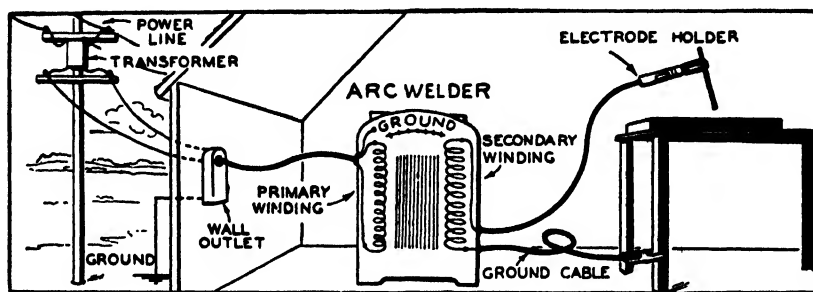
The a-c arc welder takes power from the electric line and transforms it into low-voltage heavy current suitable for welding. (James F. Lincoln Arc Welding Foundation)
